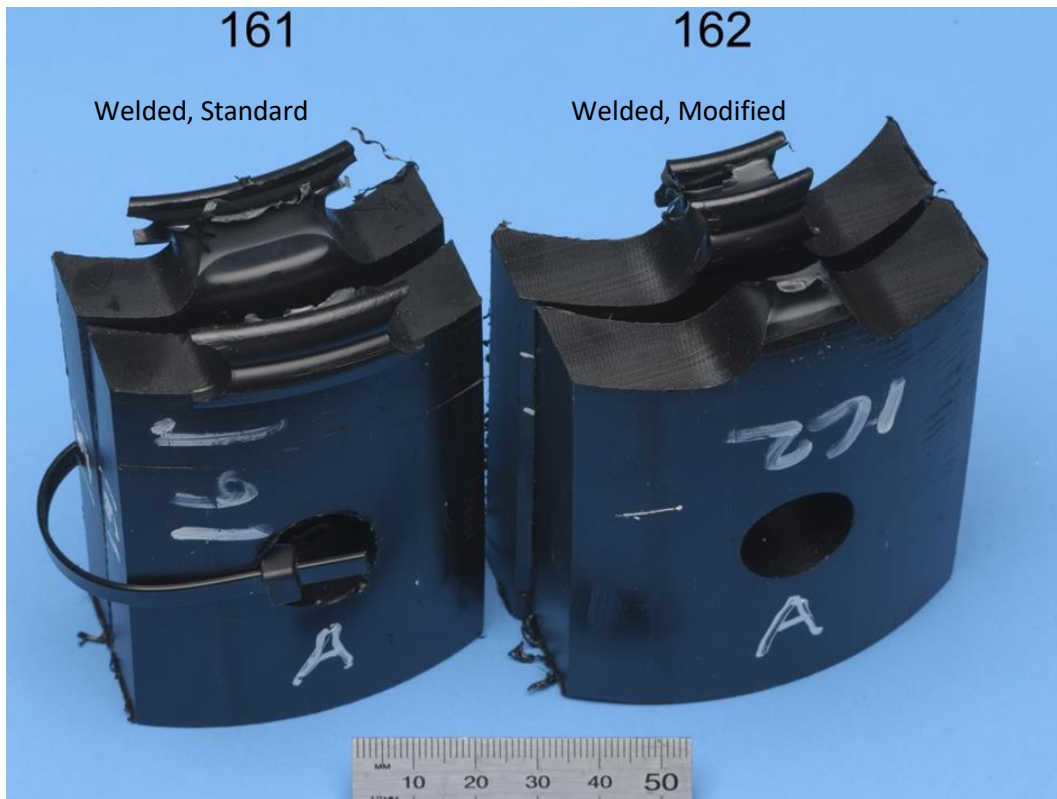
, Fracture surface of the welded standard specimen on the left and welded modified specimen geometry on the right from 140mm OD pipe
